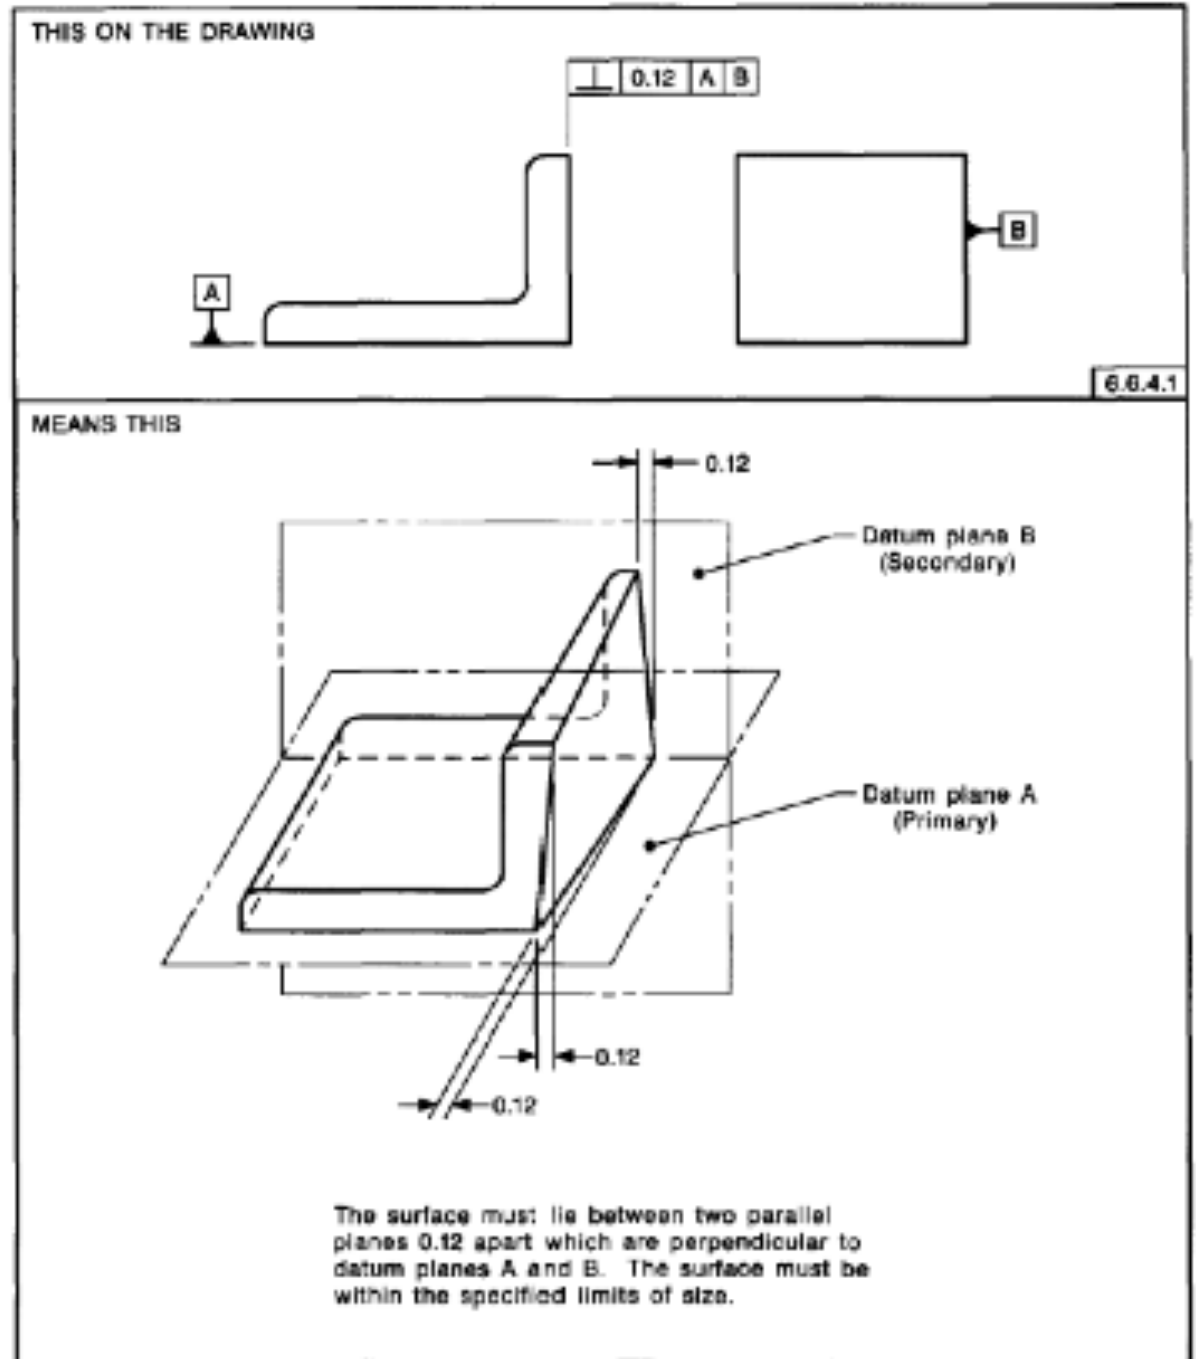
SPECIFYING PERPENDICULARITY FOR A PLANE SURFACE RELATIVE TO TWO DATUMS
